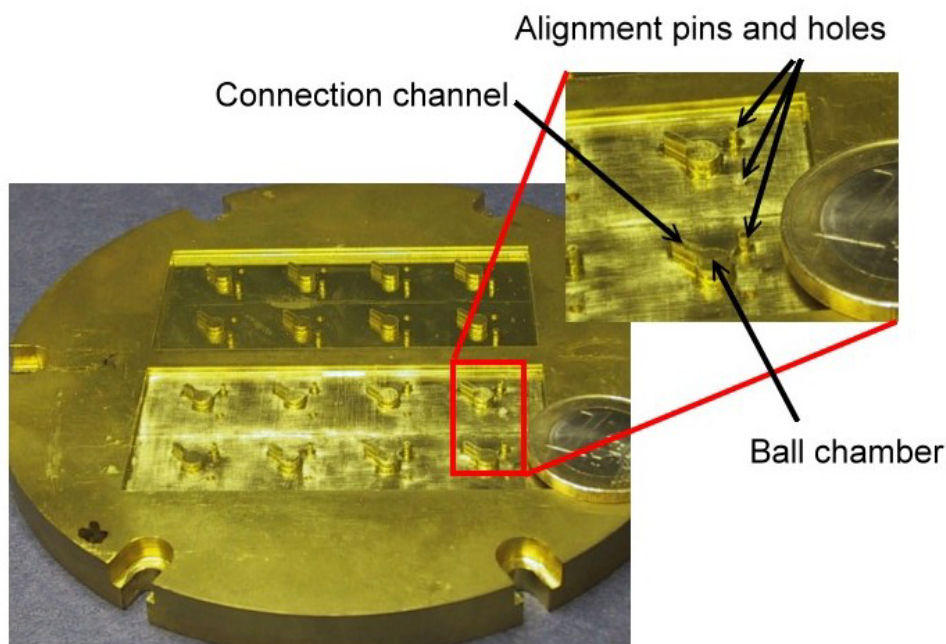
A mold for the ball chamber layers fabricated by a precision CNC machine using miniature-milling tools from tungsten carbide. The layer was separated into two parts with a thickness of 1.60 mm each. The obtained surface roughness of this mold was about $R_a = 350\text{nm}$.
